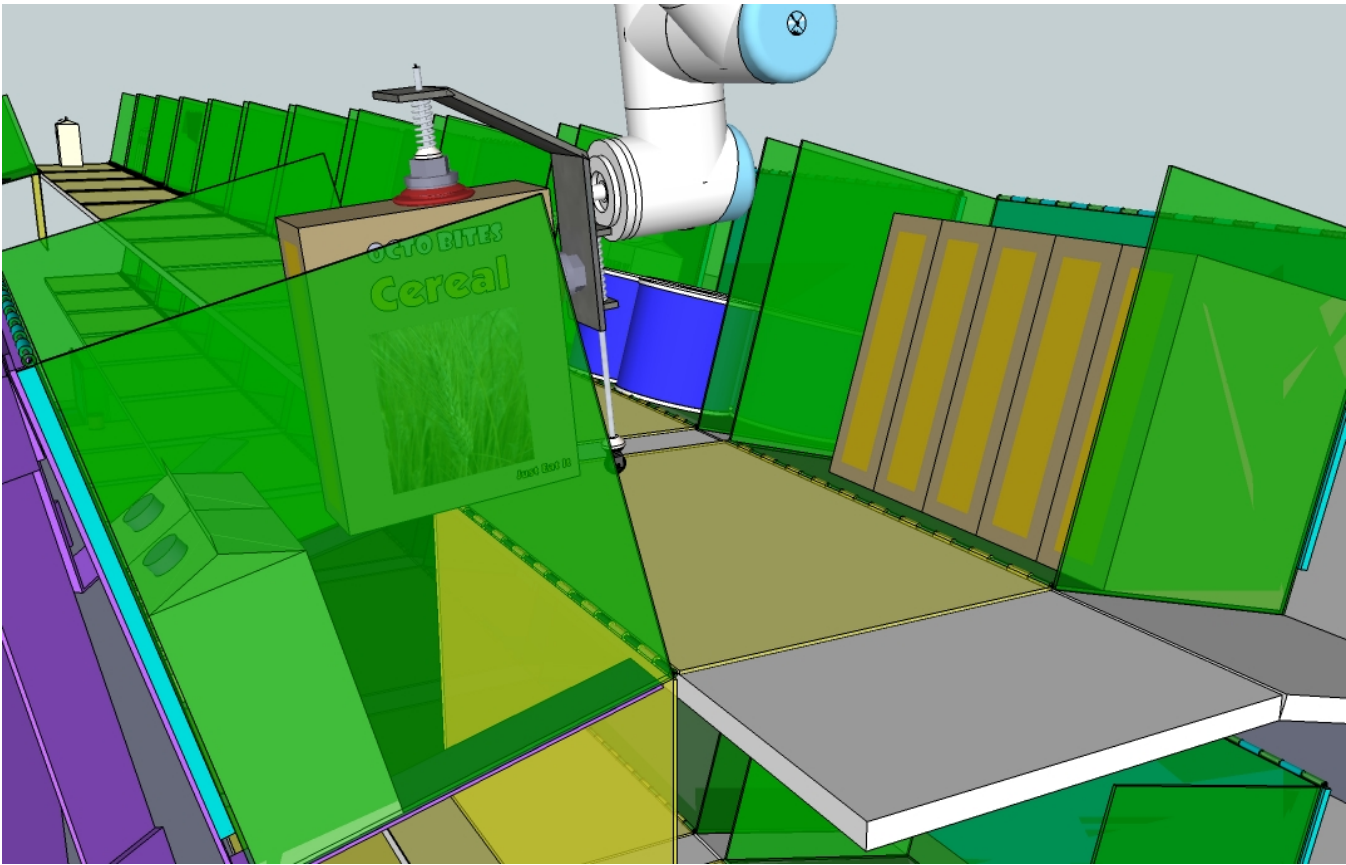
Robot Picker Member with Roller Bears Weight of Product
